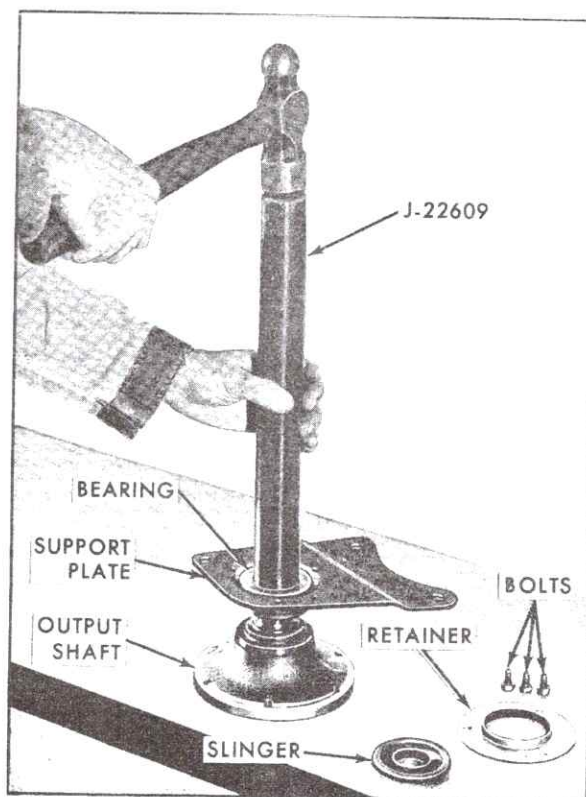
Installing Right Hand Output Shaft Support and Bearing
